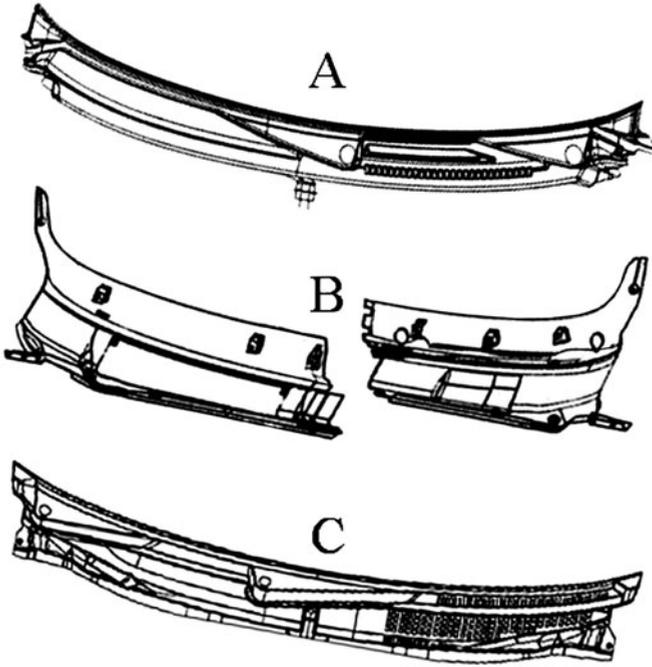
The most common windshield grille designs. A: one piece grille, screwed to body; B: split grille with screw and snap fittings; C: one piece grille with continuous windshield side fitting.
